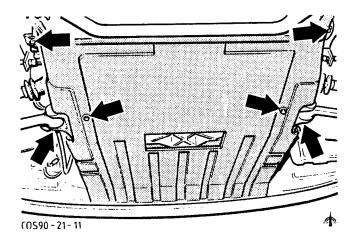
Retaining bolts of lower engine cover. (Sierra shown)
